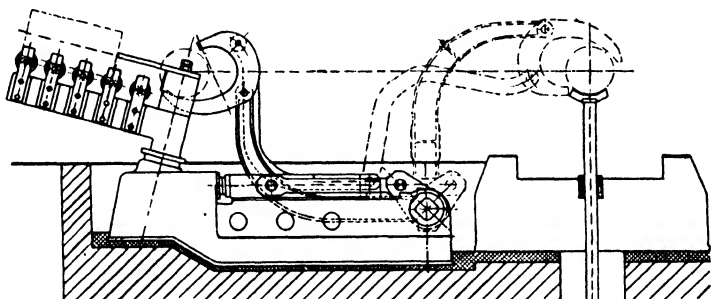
Mechanism for conveying billets from furnace to cradle of press.
